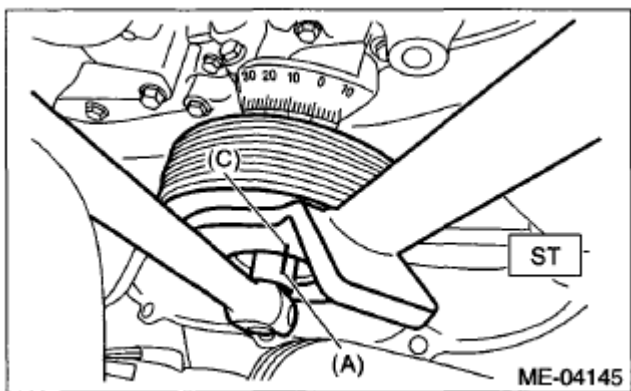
Tightening Crank Pulley Bolt To Reference Line And End Line
